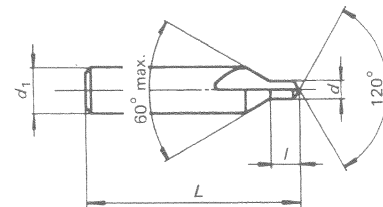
Single-ended centre drill – Type A ( $d < 0,8$  mm)
